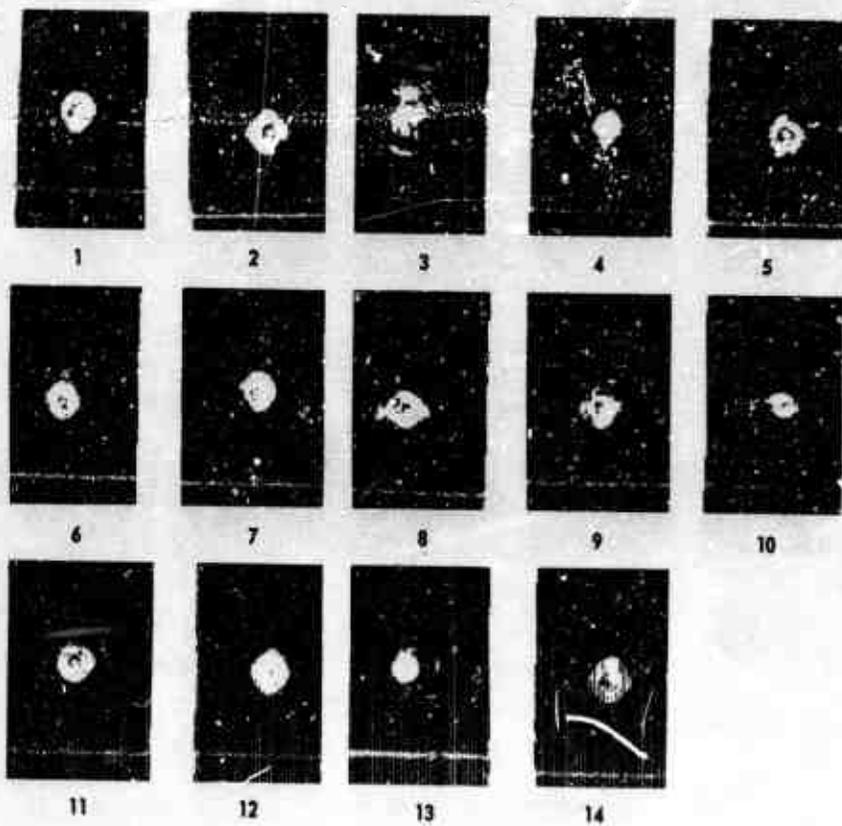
C-Scan Record of Series 3 Welds.
